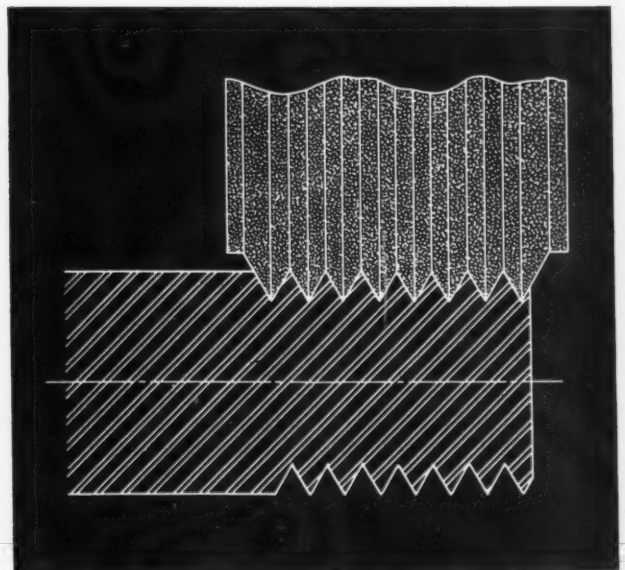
Multi-ribbed Wheel Used for Thread Grinding. The Complete Thread is Ground in One Revolution of the Work Plus about One-half Revolution for Feeding in and Withdrawing Wheel
